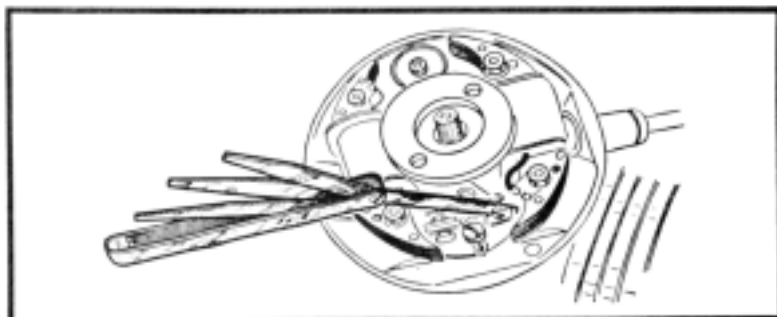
The cam on the Motobecane magneto is located on the hub, allowing easy access to the points.
